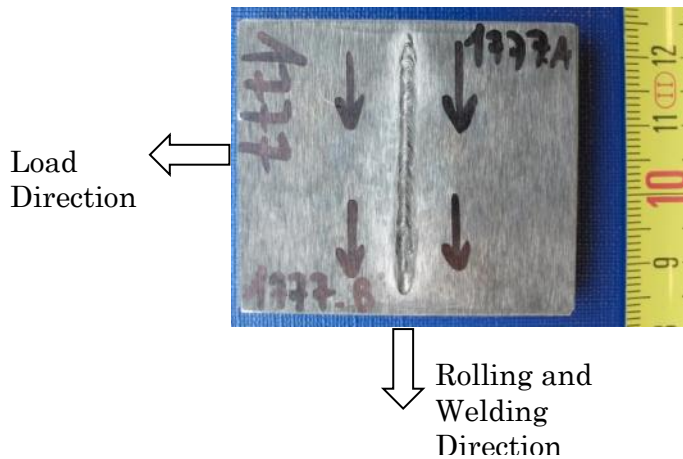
Specimen configuration for shear tensile and fatigue testing
